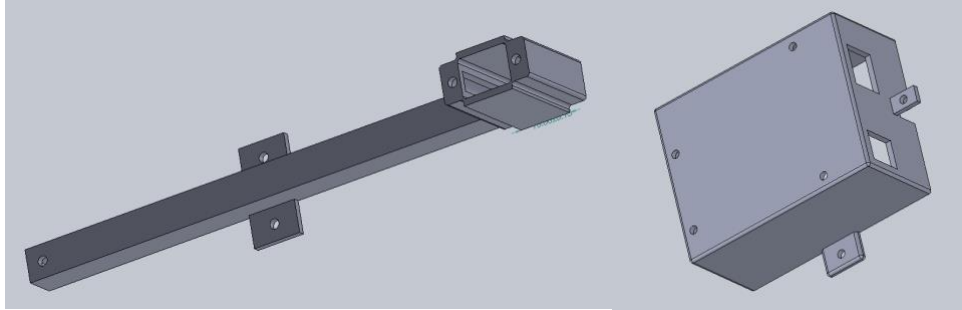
Shows CAD design for ToF sensor casing (Left) and Arduino casing (Right). Designed in SolidWorks, the pieces are designed to bind together using screws
